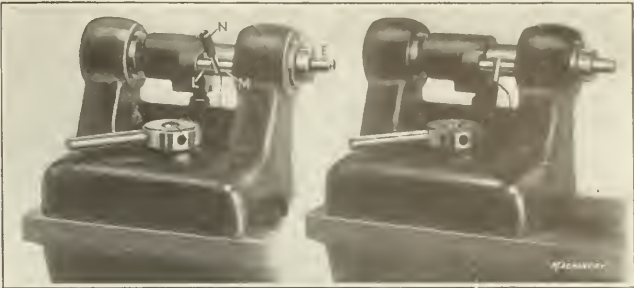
Close Views of Pratt & Whitney Measuring Machine, showing Position of Feeler Plug before and after taking a Measurement
